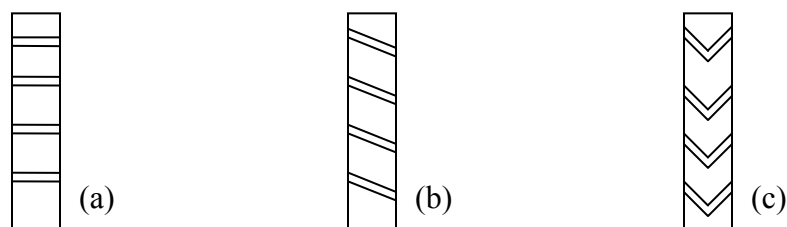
Teeth: (a) axial; (b) helical; (c) double helical
